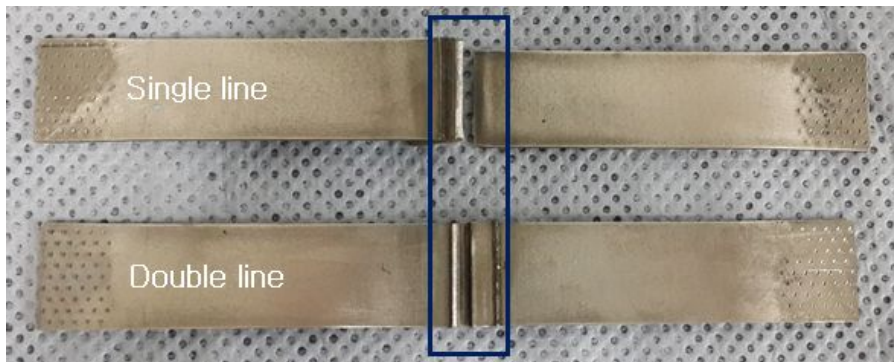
Fractured specimen after tensile-shear test(LASER)
